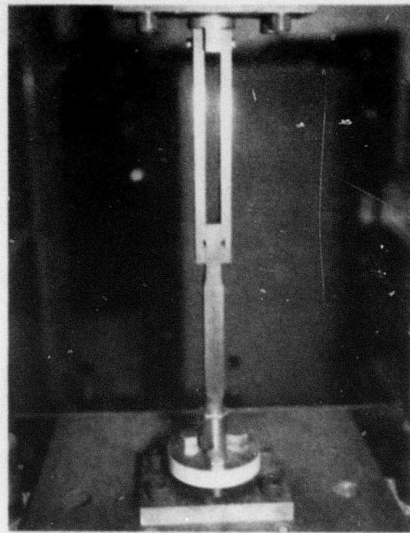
Assembled Low Cycle Fatigue Fixture in Test Machine Without Furnace
